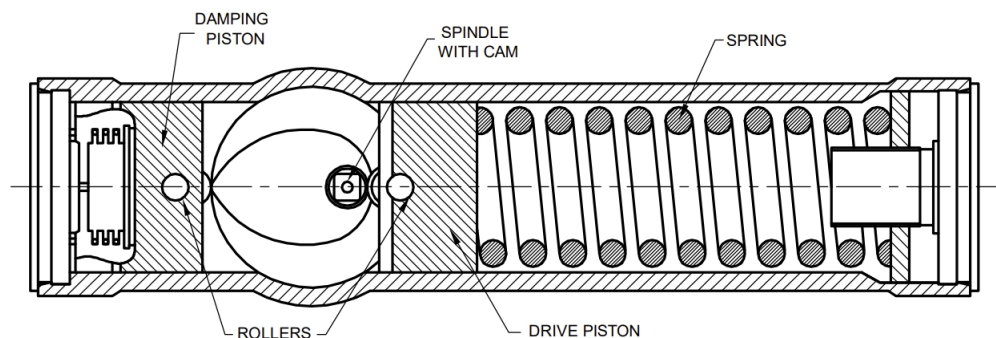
B TYPICAL SKETCH OF MECHANISM OF CAM ACTION TUBULAR TYPE HYDRAULIC DOOR CLOSER
